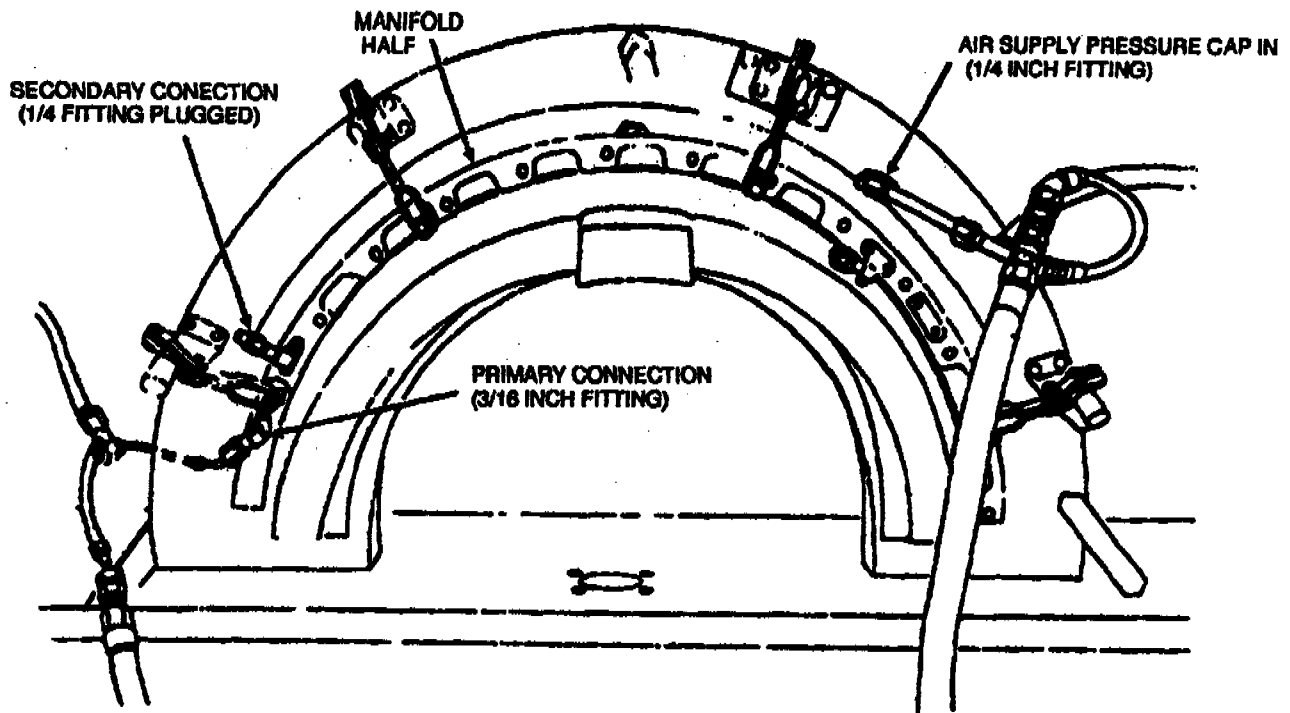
Location of Manifold and Fixture Fittings for Test.
